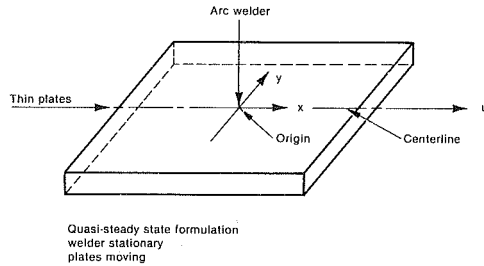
Thin-plate quasi-steady-state welding model
